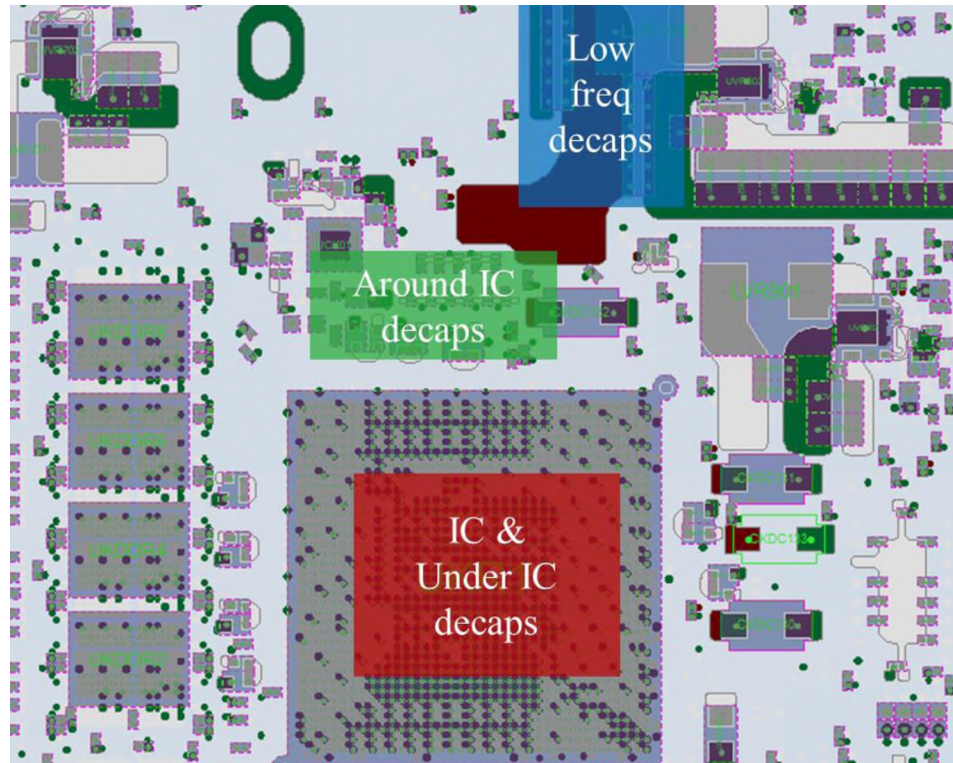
The geometry and top view of a 20-layer board showing the IC and decap locations.
